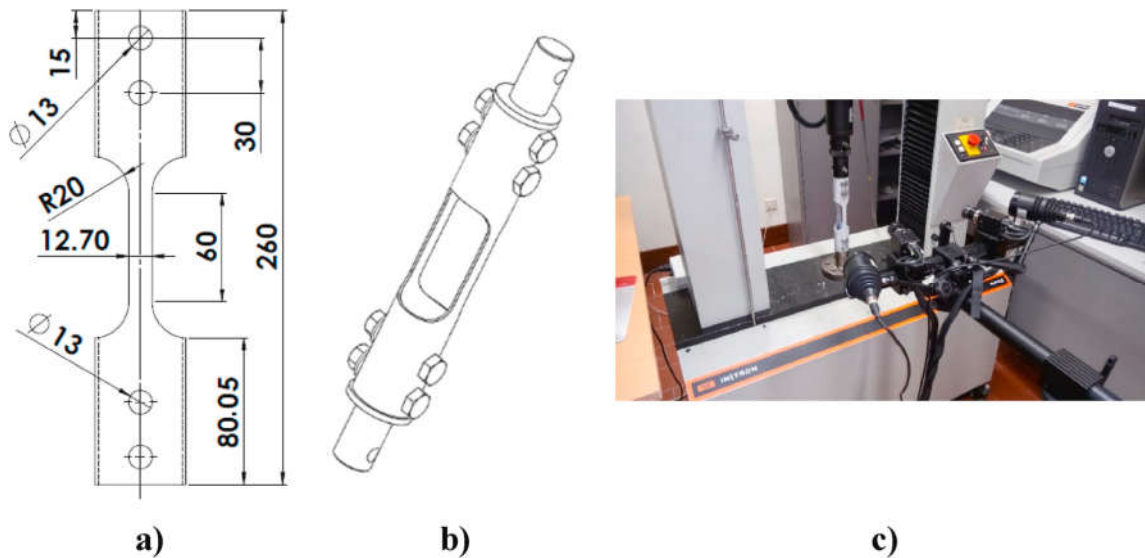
Tubular axial tensile test specimen: a) Engineering drawings and dimensions of the tubular axial tensile test specimen; b) 3D drawing sketch of the sample with specific mandrels to tie it to the tensile machine jaws; c) experimental setup used to carry out uniaxial tensile test along the tube axial direction.
